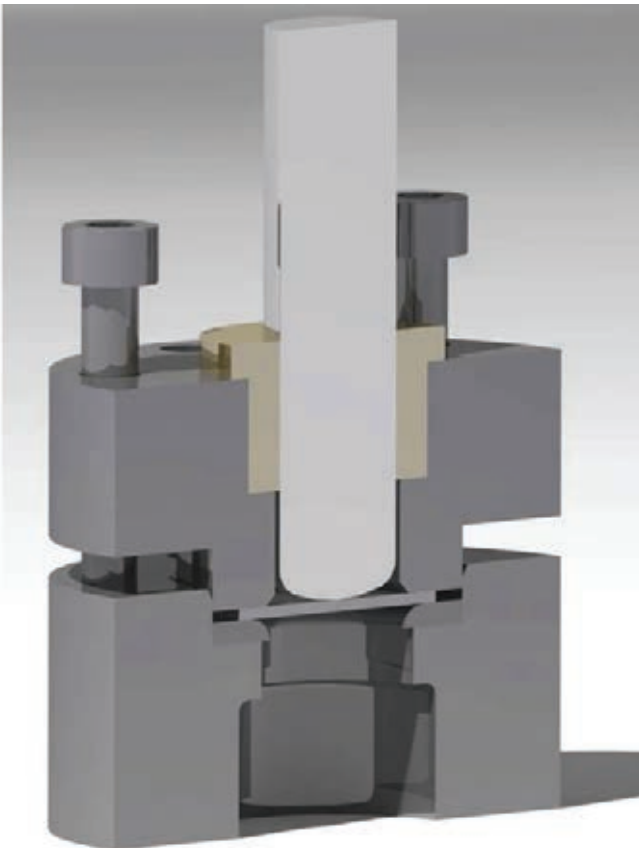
The deep drawing tool is made of stainless steel (316). The tungsten plate is fixed by a hold down device pressed by screws. The whole tool is placed into the furnace of a universal test device.
